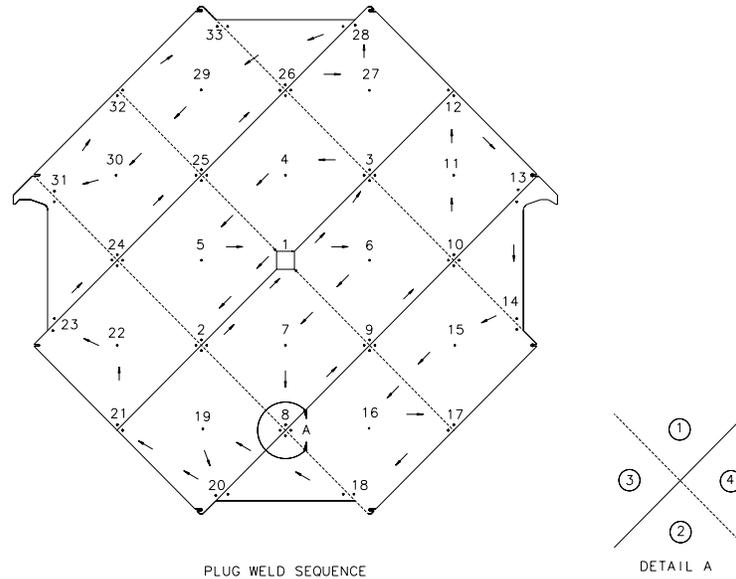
Sequence of plug welding operations to assemble an 8-m wide, 1-inch thick octagonal steel plane from eight 2-m wide, 0.5-inch thick plates.
